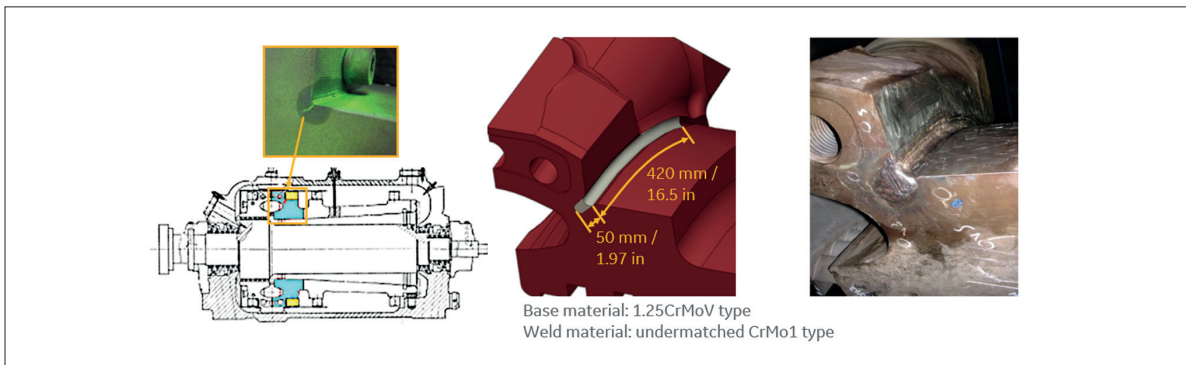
Hot repair without PWHT of an HP inner casing with shrink rings
